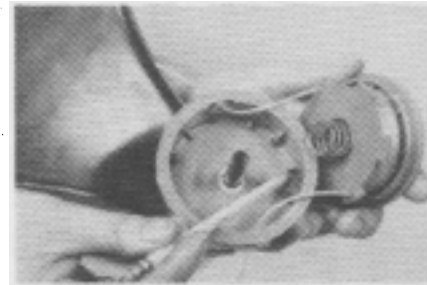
Check indexing teeth on inner and outer spool for wear. If necessary, deburr or replace.
